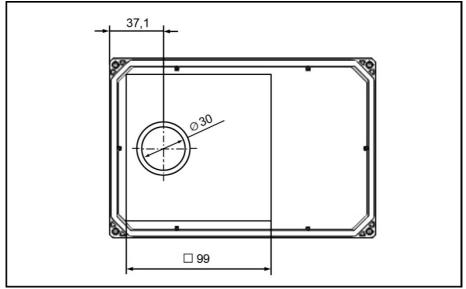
Hole pattern for size  $\alpha$  standard adapter plate
